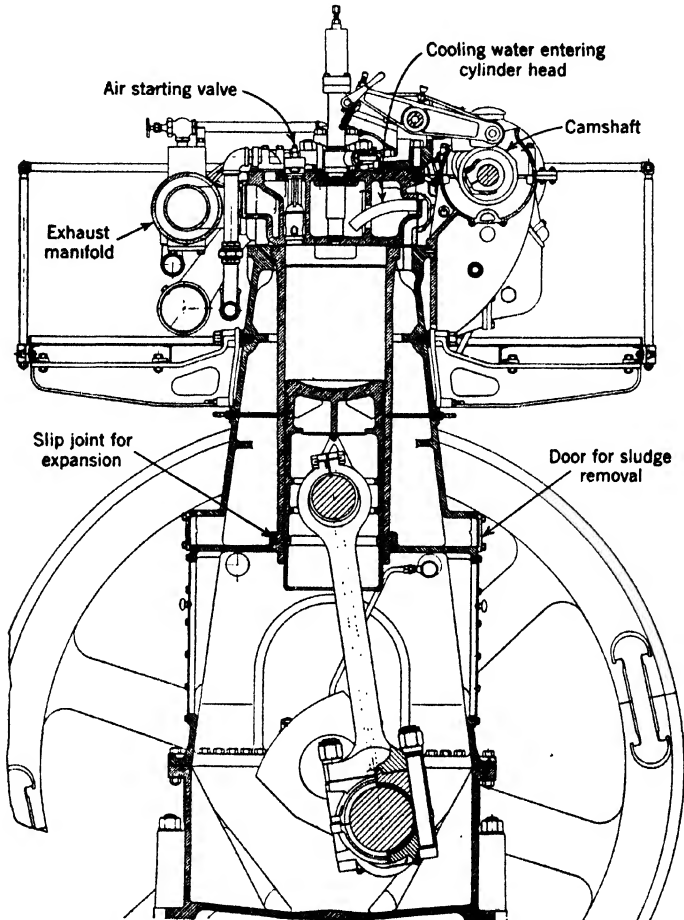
Section through cylinder of four-stroke cycle air-injection Fulton Diesel engine.
